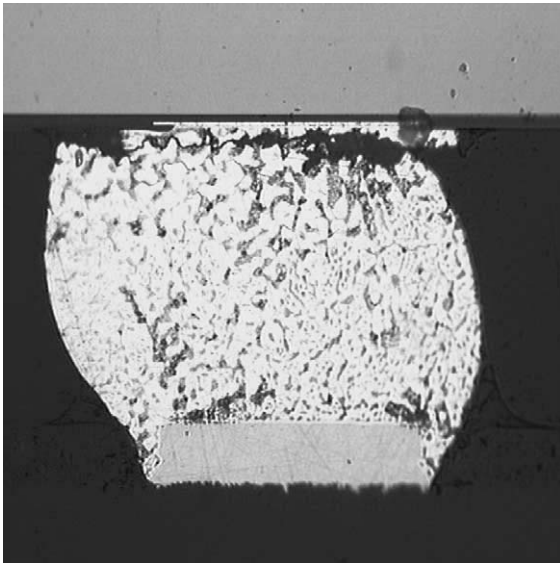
Cross-section of a Spheron WLP™ solder joint after TC test. The failure mechanism is solder fatigue.
